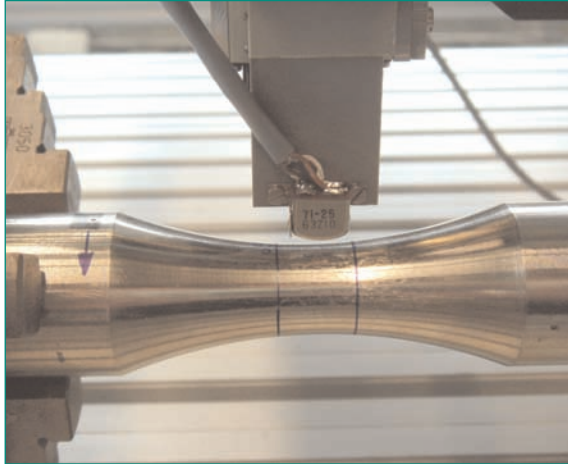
Magnetic reading head used to scan the surface of a fatigued specimen for detecting cracks.
